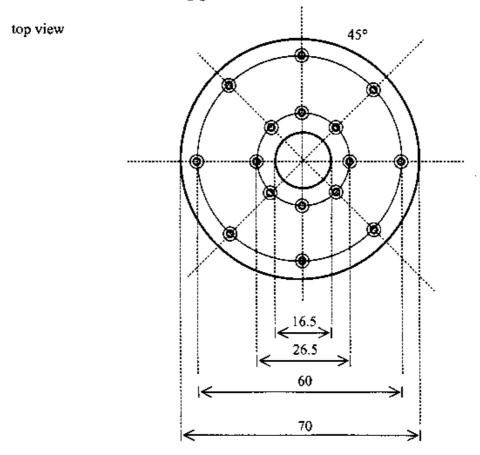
Mechanical drawing of a coaxial target, part 3/5
